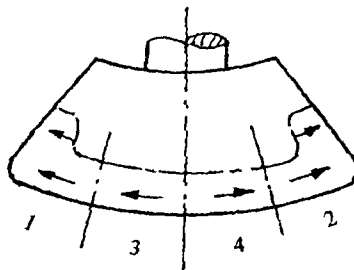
Process of thermal spray welding of axial runner blades
